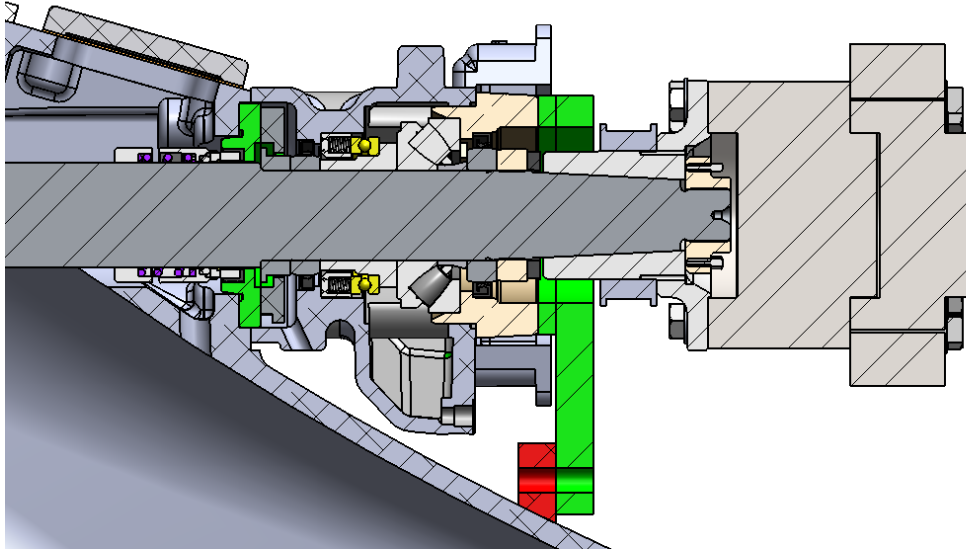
Cross-Section of the Thrust Bearing Housing
